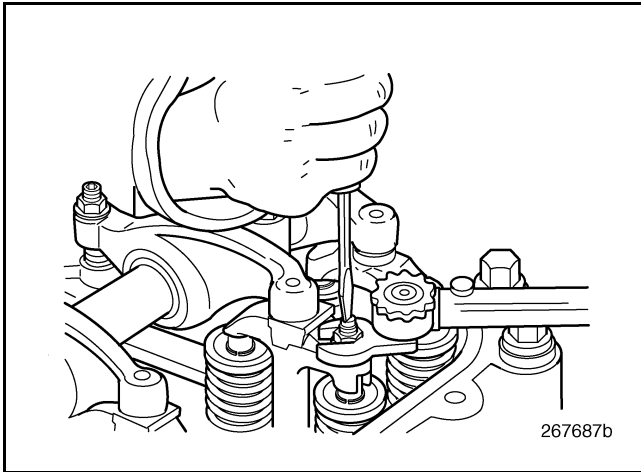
Yoke Adjusting Screw and Jam Nut (Slotted Screw Shown)
